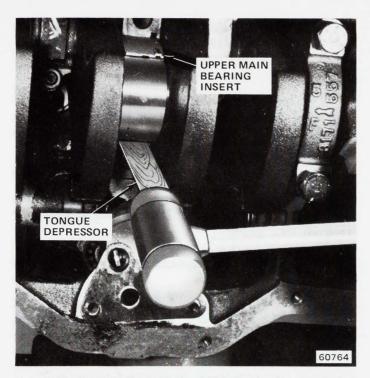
B-117 Removing No. 4 Main Bearing Insert
